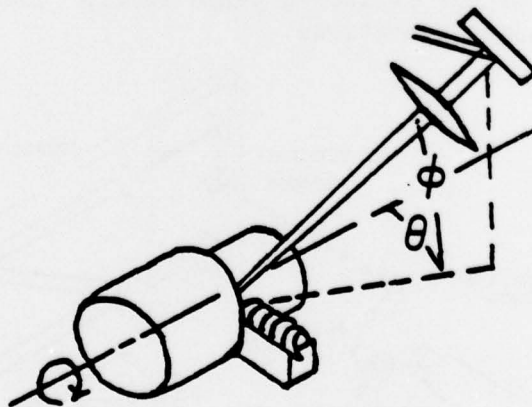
Relationship of beam and workpiece for laser assisted machining.
